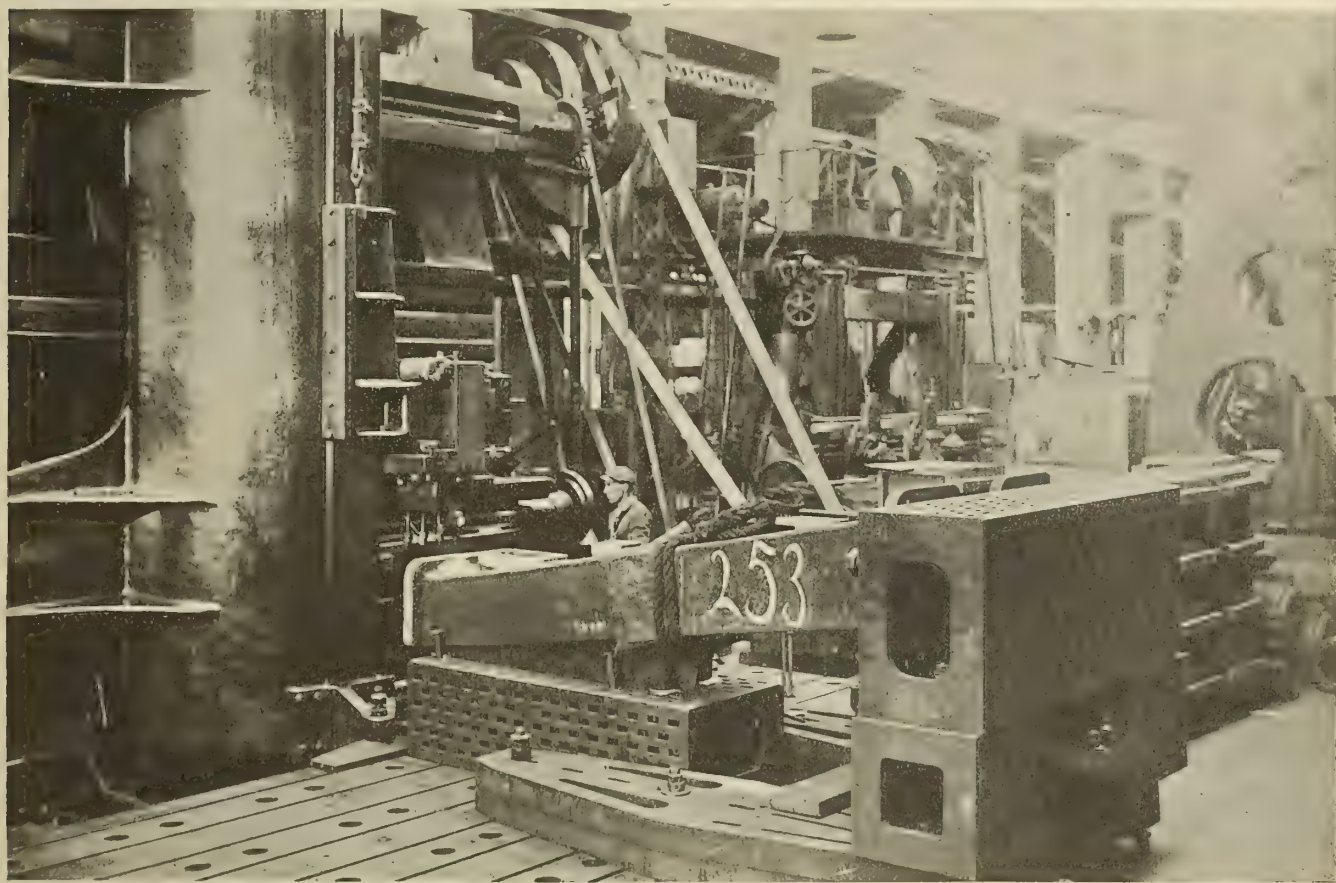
Method of Planing Housings to Exact Length on a Wall Planer
